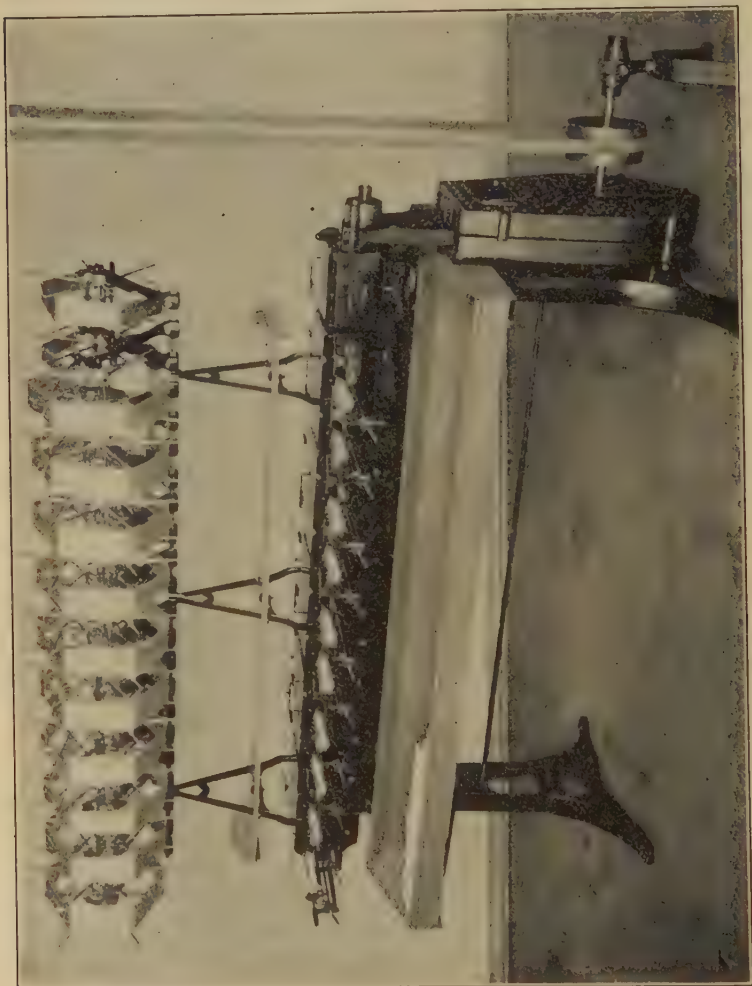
Winding Machine No. 90 for Winding Rayon directly from Skeins onto Bobbins.
